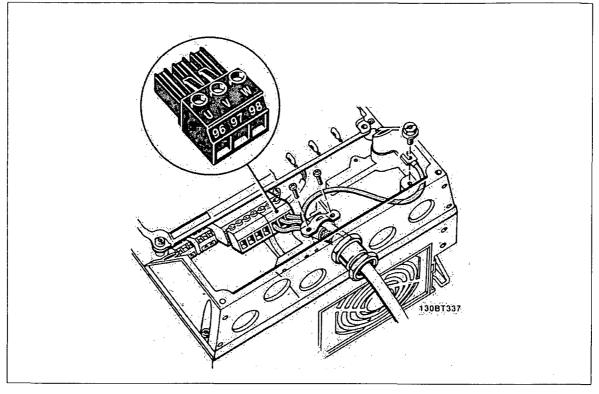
First terminate the motor earth, then place motor U, V and W wires in terminal and tighten. Please ensure that the outer insulation of the motor cable is removed under the EMC clamp.
